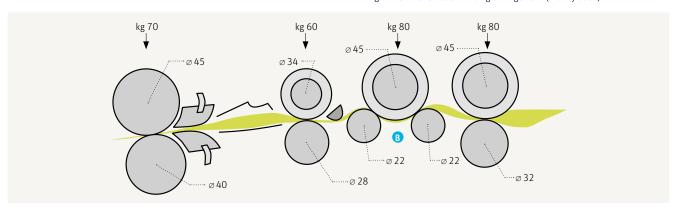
3-over-4 roller drafting arrangement (Marzoli)
